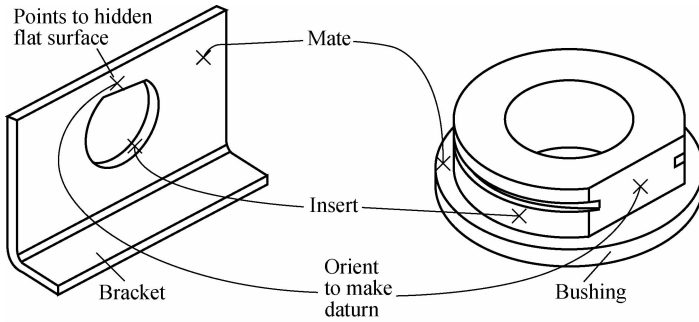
Constrain for assembly the bracket and bushing parts
